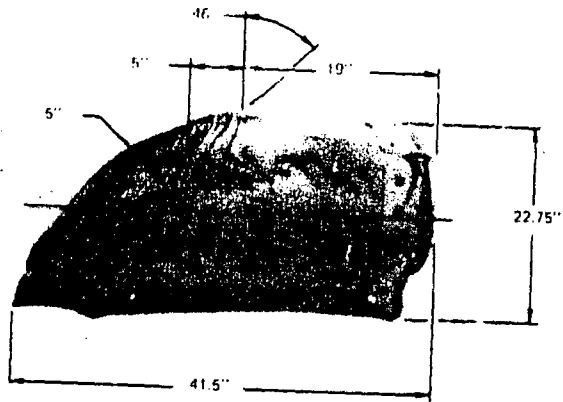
PAT-1 Dimensions Following 443-FPS Bottom Corner Impact
